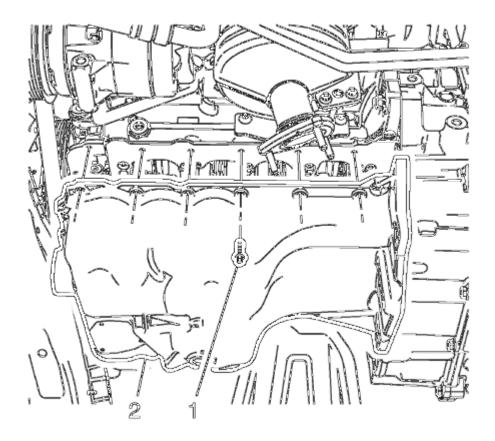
Engine Front Cover, Oil Suction Gallery And Screw Bore Courtesy of GENERAL MOTORS COMPANY
